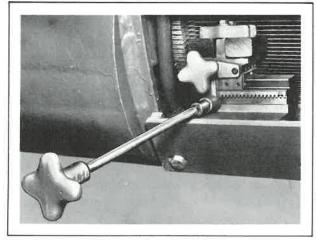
MIDGET COMMUTATOR GRINDER INSTALLED IN GE752 MOTOR.
